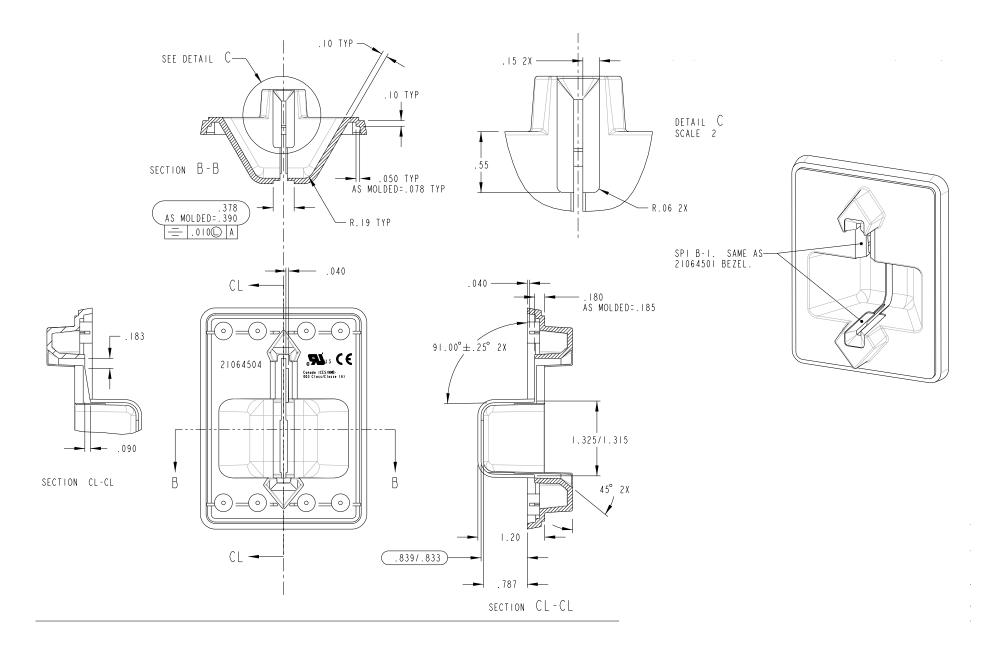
Dimensions for Extended Bezel Design, Sheet 2
